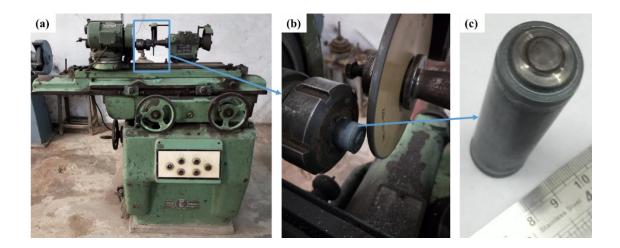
Photographs of FSP tool profile preparation (a) tool grinding machine, (b) closure view of tool and grinding wheel, and (c) prepared FSP tool.
